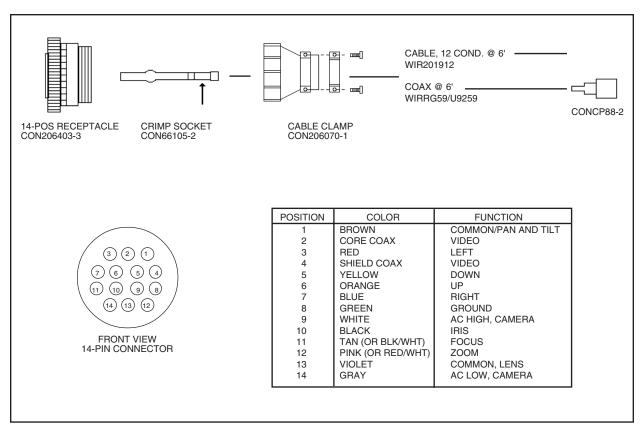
Mating Cable Assembly Configuration (non-PP Versions)
